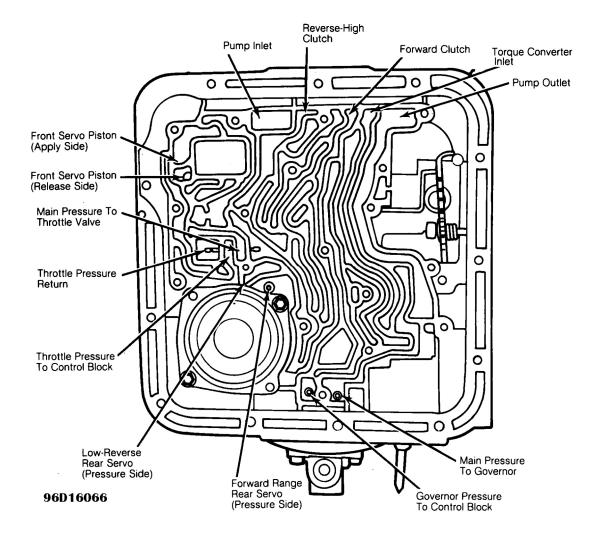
Bottom View of Transmission Case Courtesy of FORD MOTOR CO.
